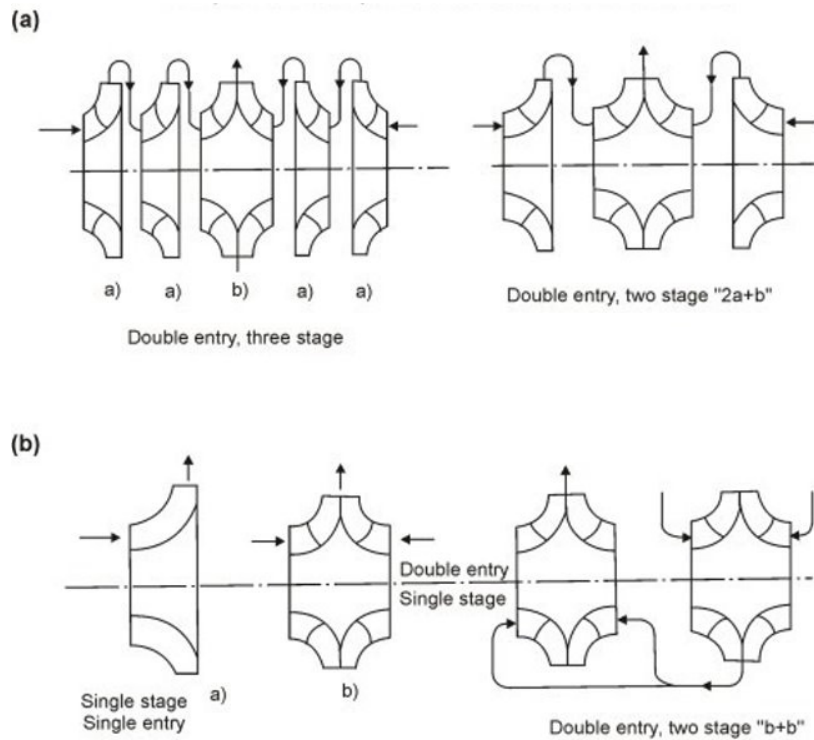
Impeller arrangements referring to class, type, and staging of pumps
